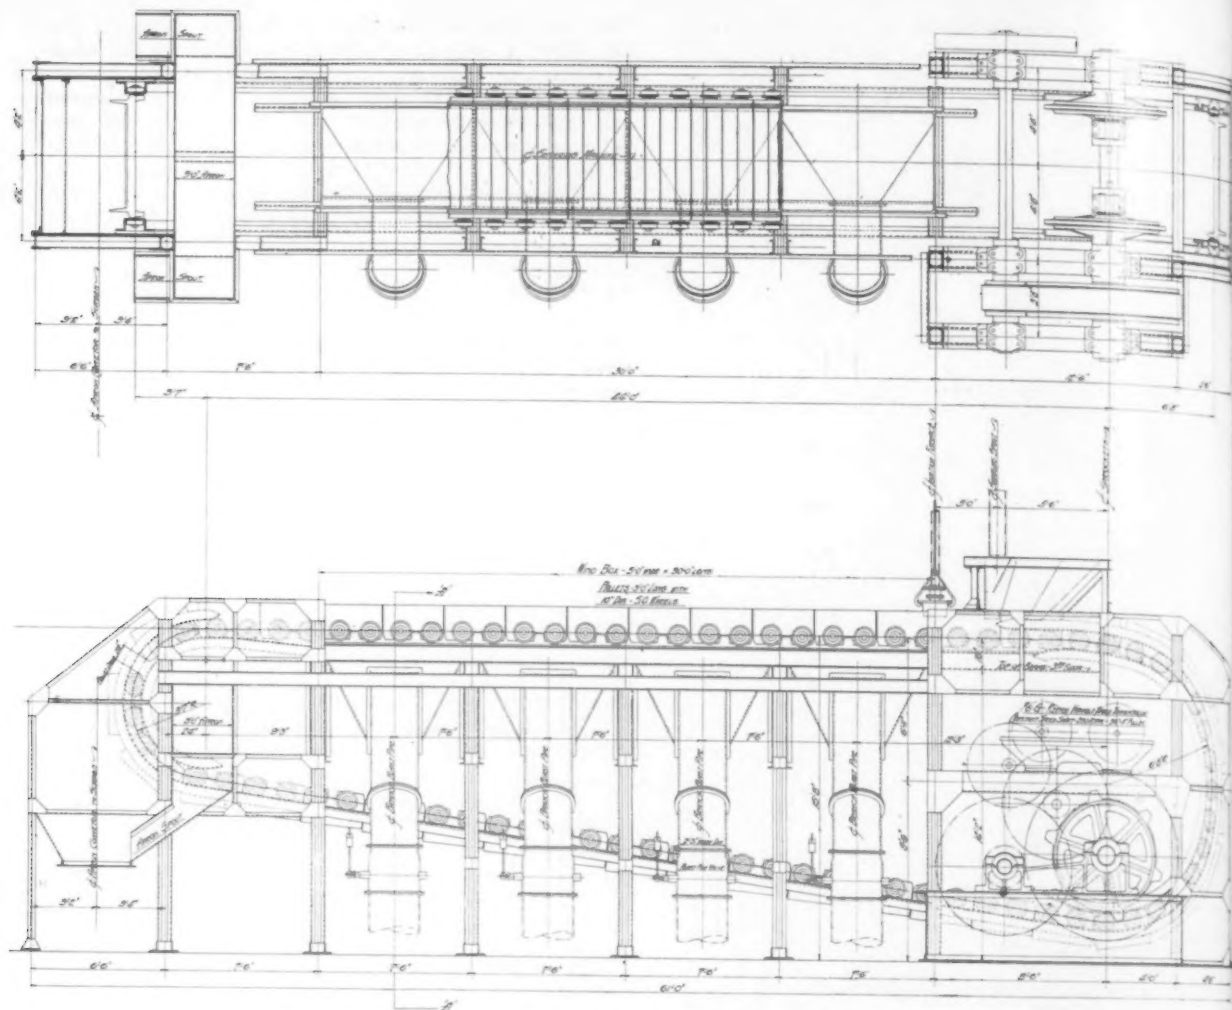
Large Size Dwight and Lloyd Continuous Sintering Machine
